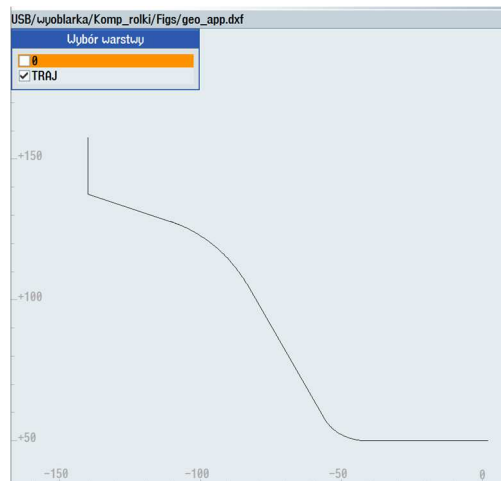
The patch of the code point with removed unnecessary drawing layers
